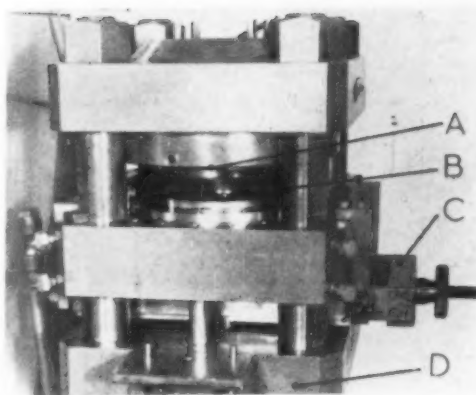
Swift cupping press arranged for stretch forming with serrated plate clamping. A, die with serrated face. B, serrated plate on pressure plate. C, adjustable stopping table. D, main cylinder (operating hemispherically nosed punch)
